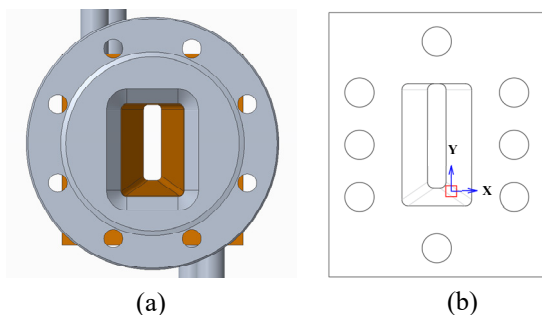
(a) CAD model of the mask assembly, front view; (b) CAD drawing of the mask model used in the analysis, front view, showing the beam footprint.
